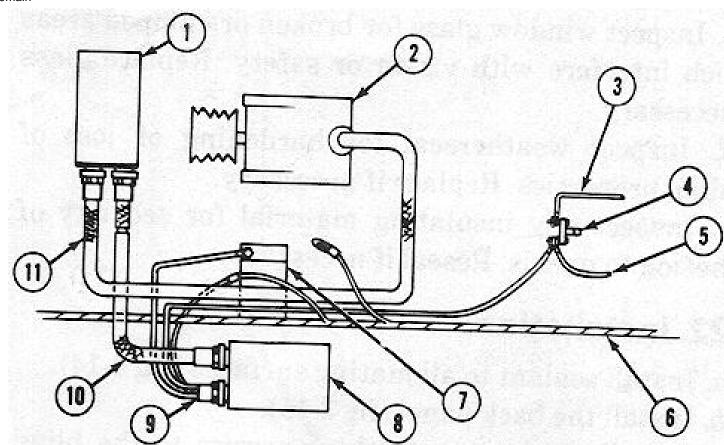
E11 100 AMP. ALTERNATOR KIT WIRING CONNECTIONS
